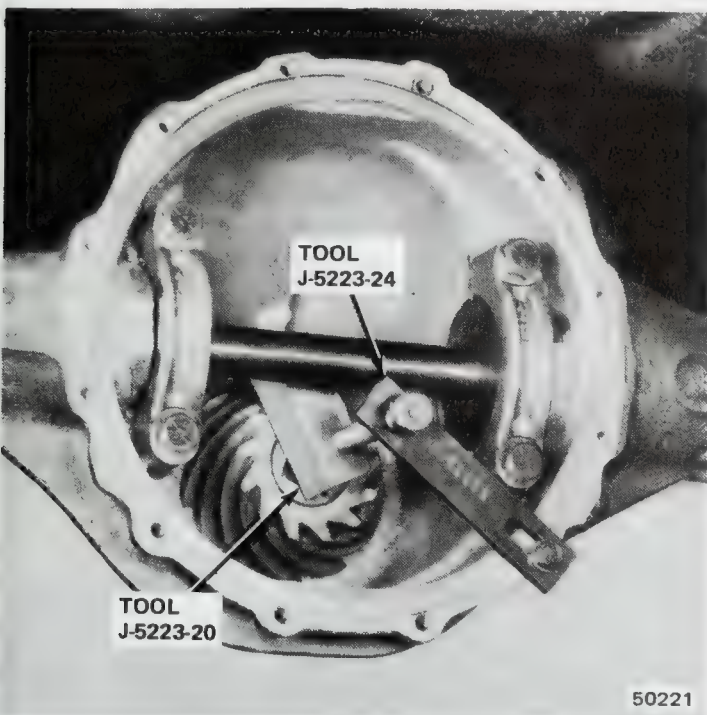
E-24 Installing Pinion Depth Measurement Tools
